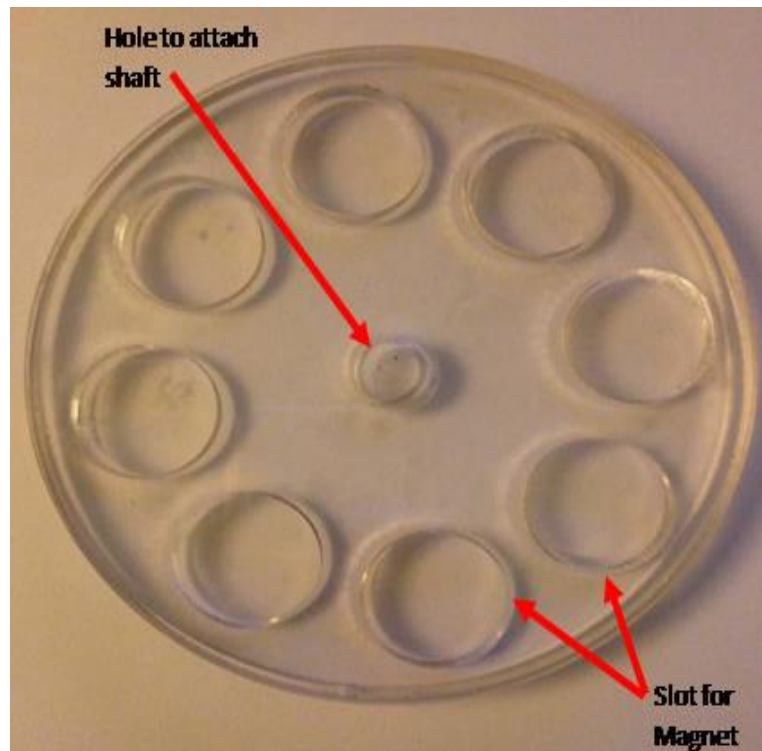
This shows our initial rotor design. While our final design uses ten magnets, this design only used eight magnets.
